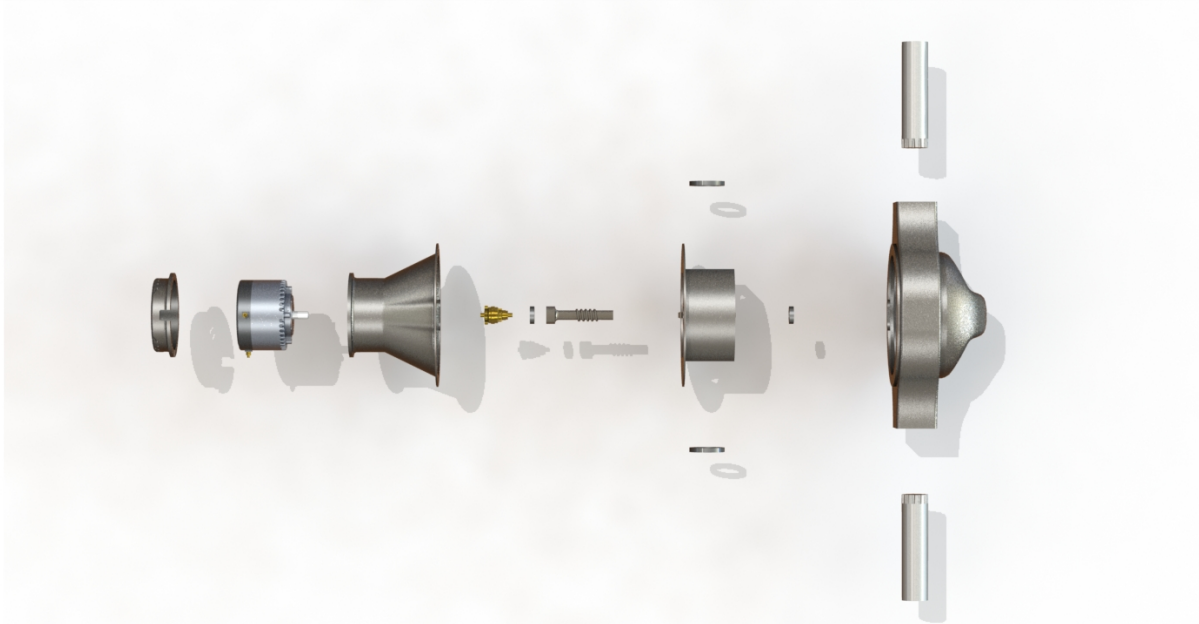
Exploded view of entire assembly (ring gear concealed by gearbox insert)
